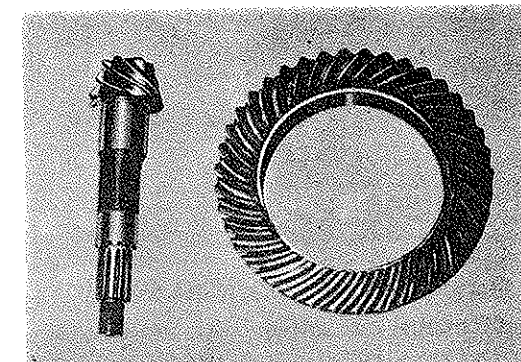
Checking of Drive Pinion and Ring Gear
